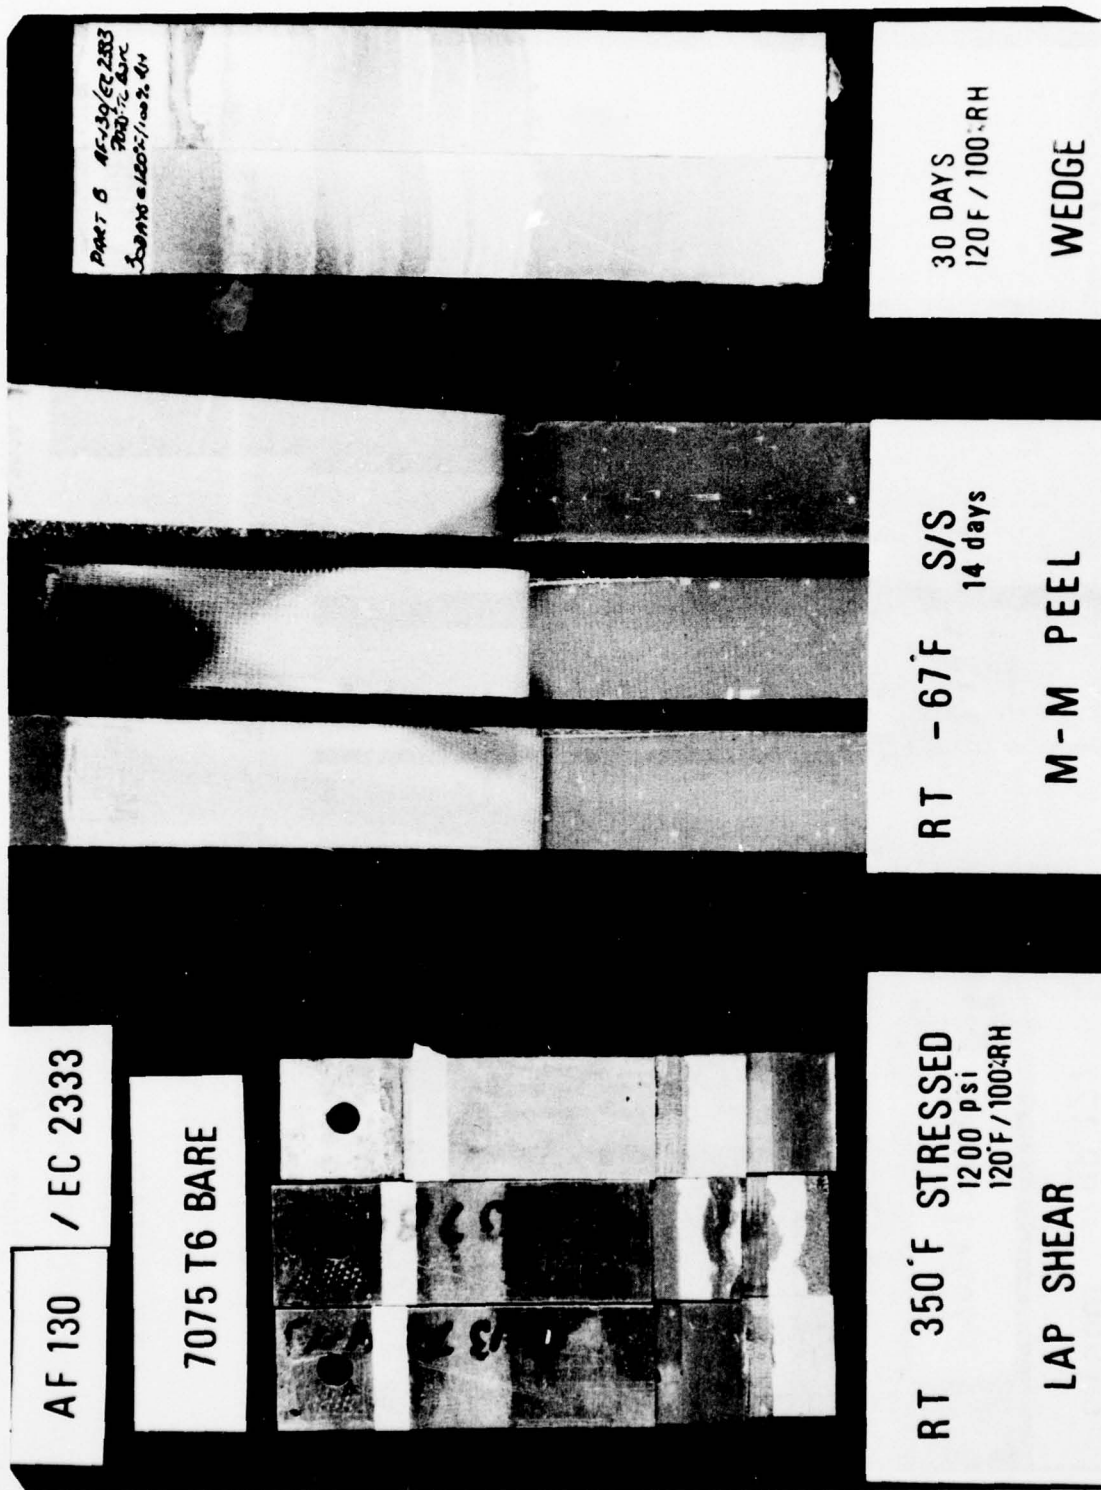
Specimen Bond Surfaces -- AF 130, 7075-T6 Bare
